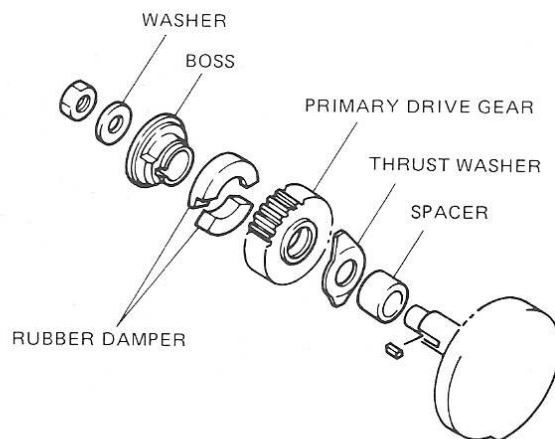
A.30 YT 60 primary drive gear/damper components — exploded view (Sec 20)
